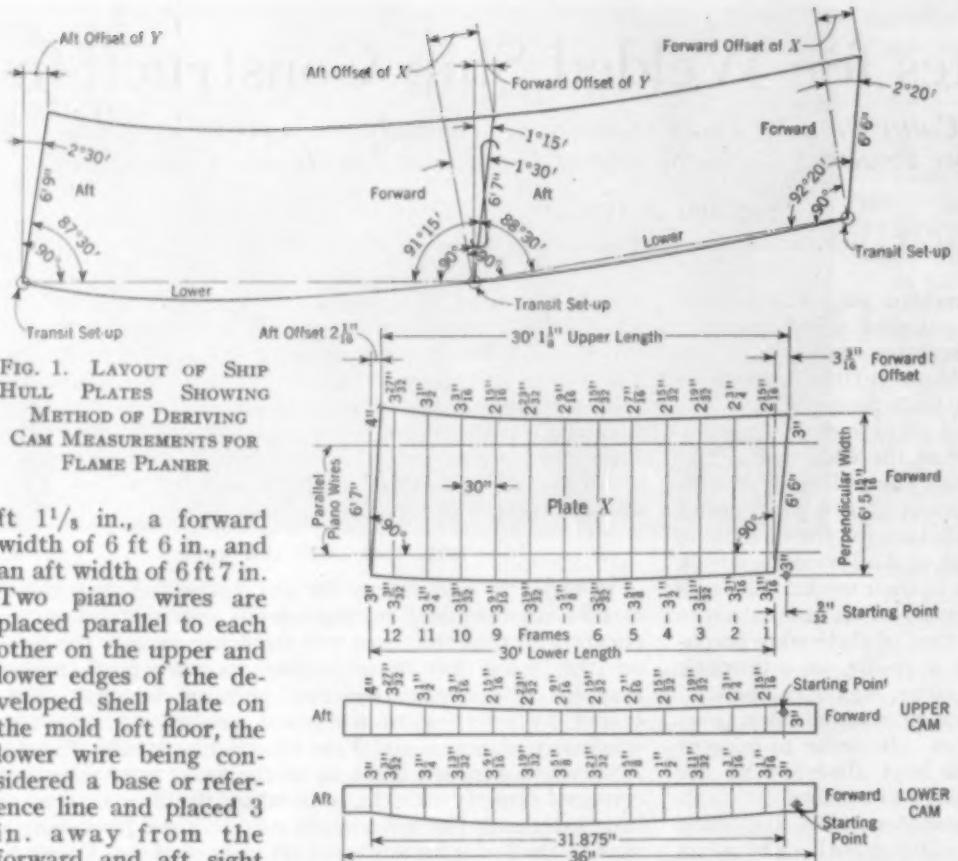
LAYOUT OF SHIP HULL PLATES SHOWING METHOD OF DERIVING CAM MEASUREMENTS FOR FLAME PLANER
